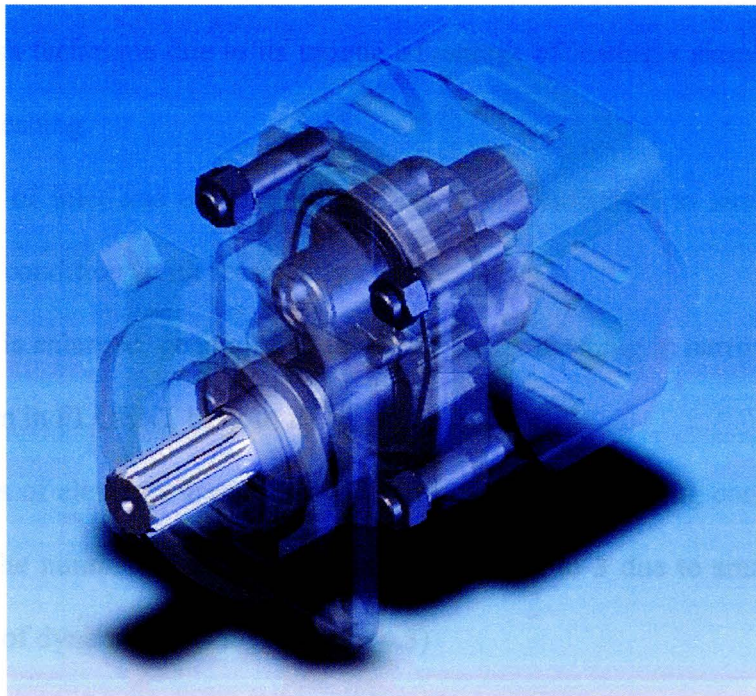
3-D Model of Gear Pump in SolidWorks
